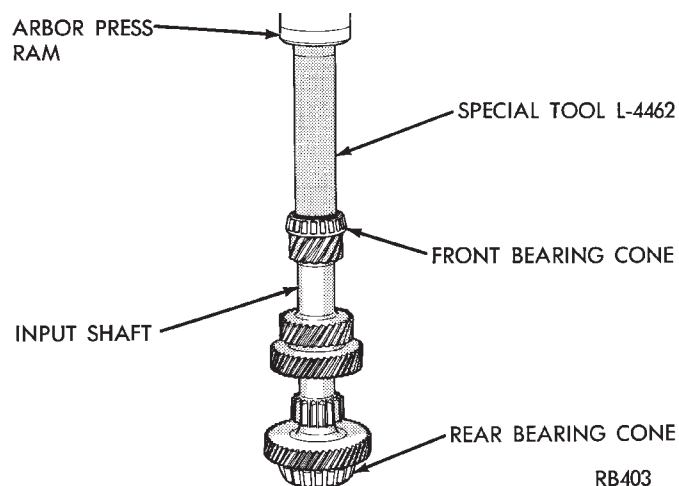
Remove Input Shaft Rear Bearing Cone
